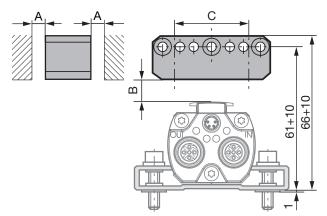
Dimensions and distances with BTL5-P-5500-2 magnet
